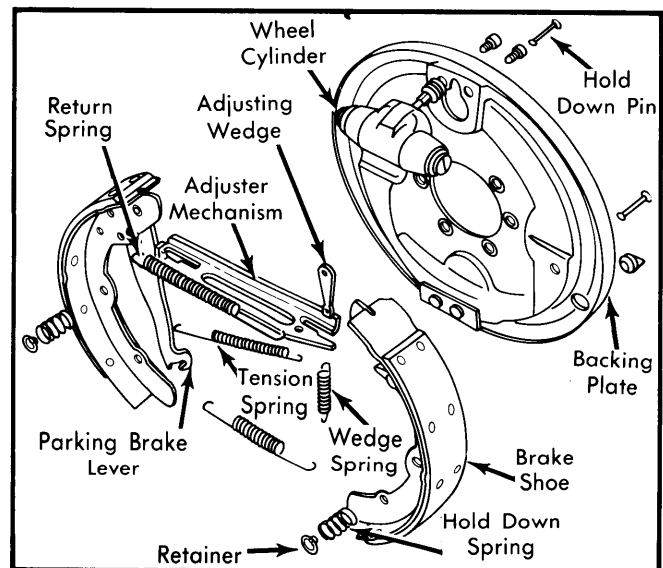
Exploded View of Rear Drum Brake Assembly (Audi 4000 and 5000 Models)
